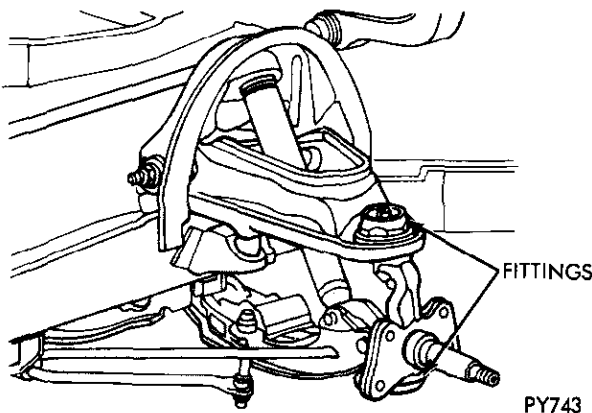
Upper and Lower Ball Joints (Coronet & Charger)
